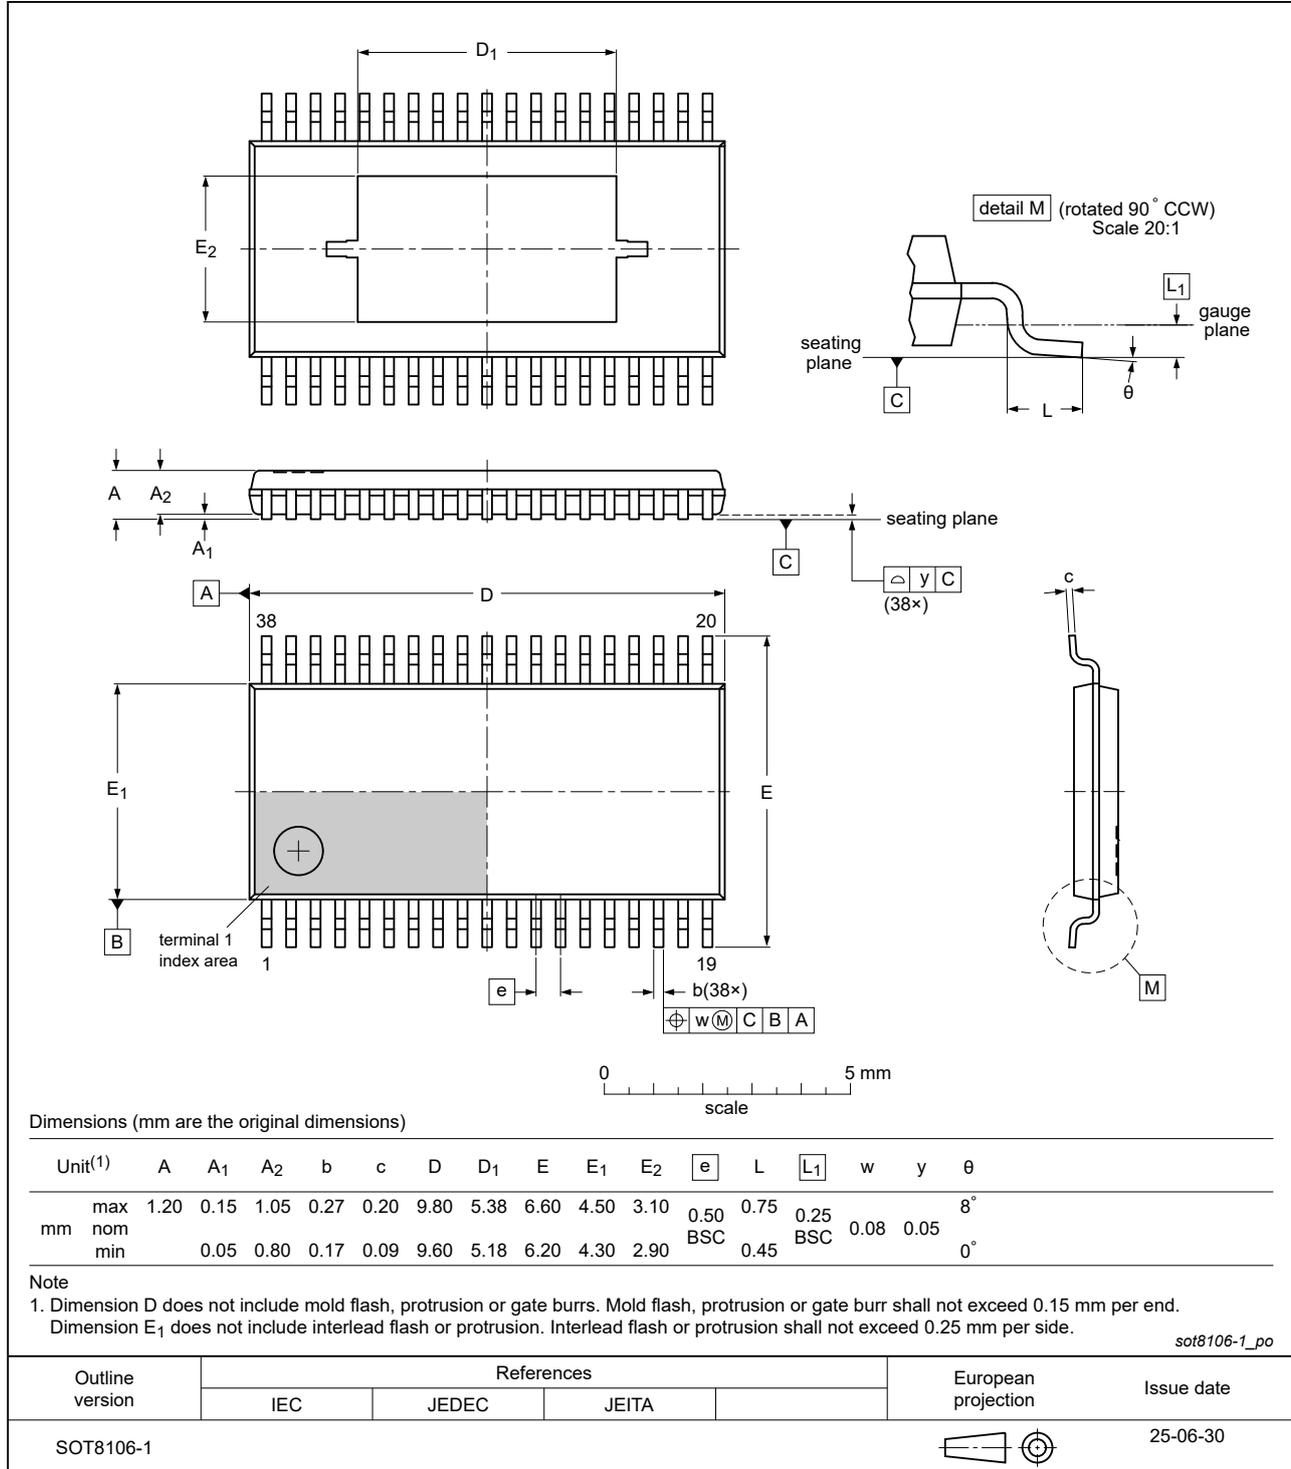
Package outline SOT8106-1 (HTSSOP38)
